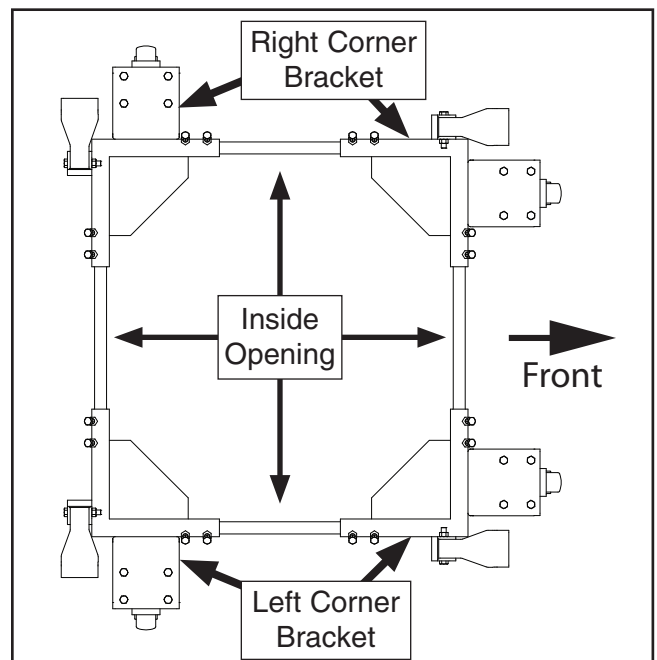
Example of assembled mobile base with inside opening slightly larger than machine base to ensure easy fit.
